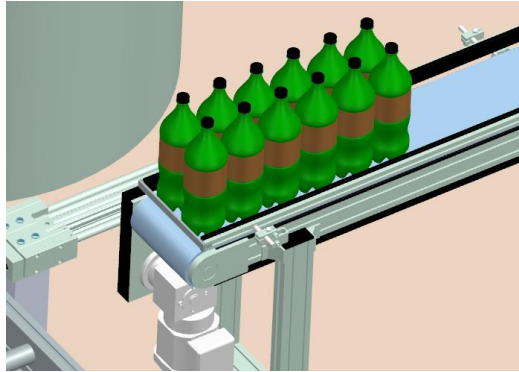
The bottle package assembly in the NX interface: belt conveyor → plastic bottle boxes → stopper
